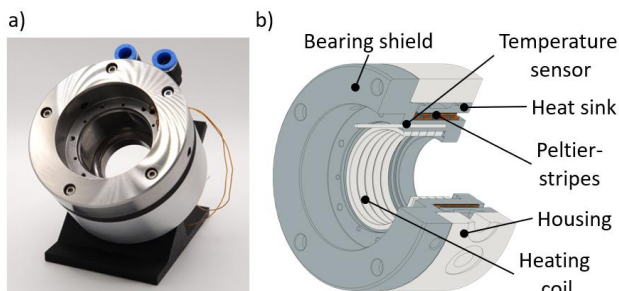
a) Photo of the assembled functional prototype without coil tube heating cartridge. b) Cross-sectional representation of the functional prototype with labelled components.
